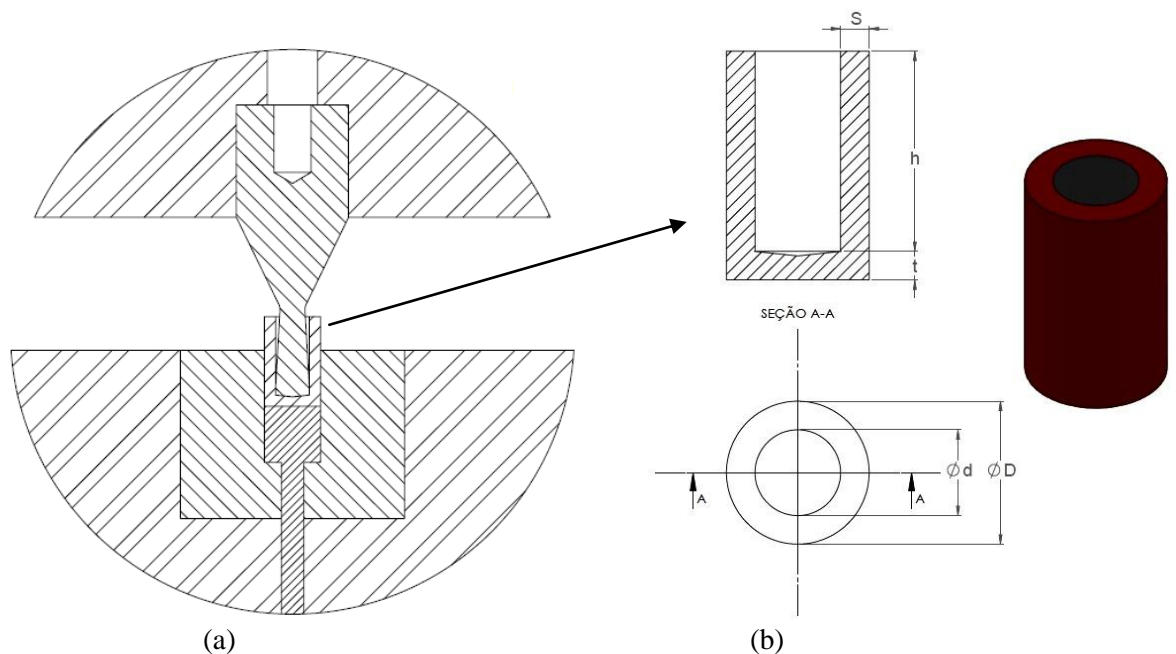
Work piece generated by indirect extrusion: (a) detail of the punch and the extrusion die, (b) work piece extruded.
